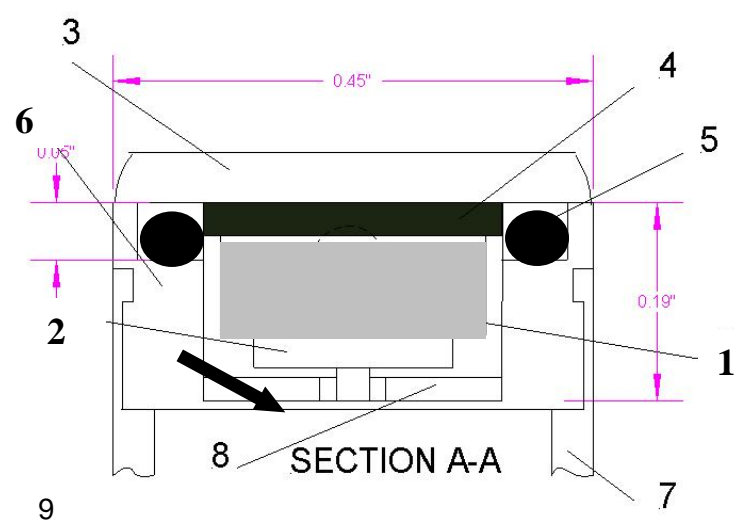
Cross-section of the implantable tonometer. (1) force transducer, (2) pin, (3) and (6) stainless steel housing, (4) Rubber layer generating prestress, (5) O-ring, (7) U-shape supporting structure, (8) stainless steel washer, (9) arterial wall. An arrow ↓ indicates a thin wall of a stainless steel housing.
